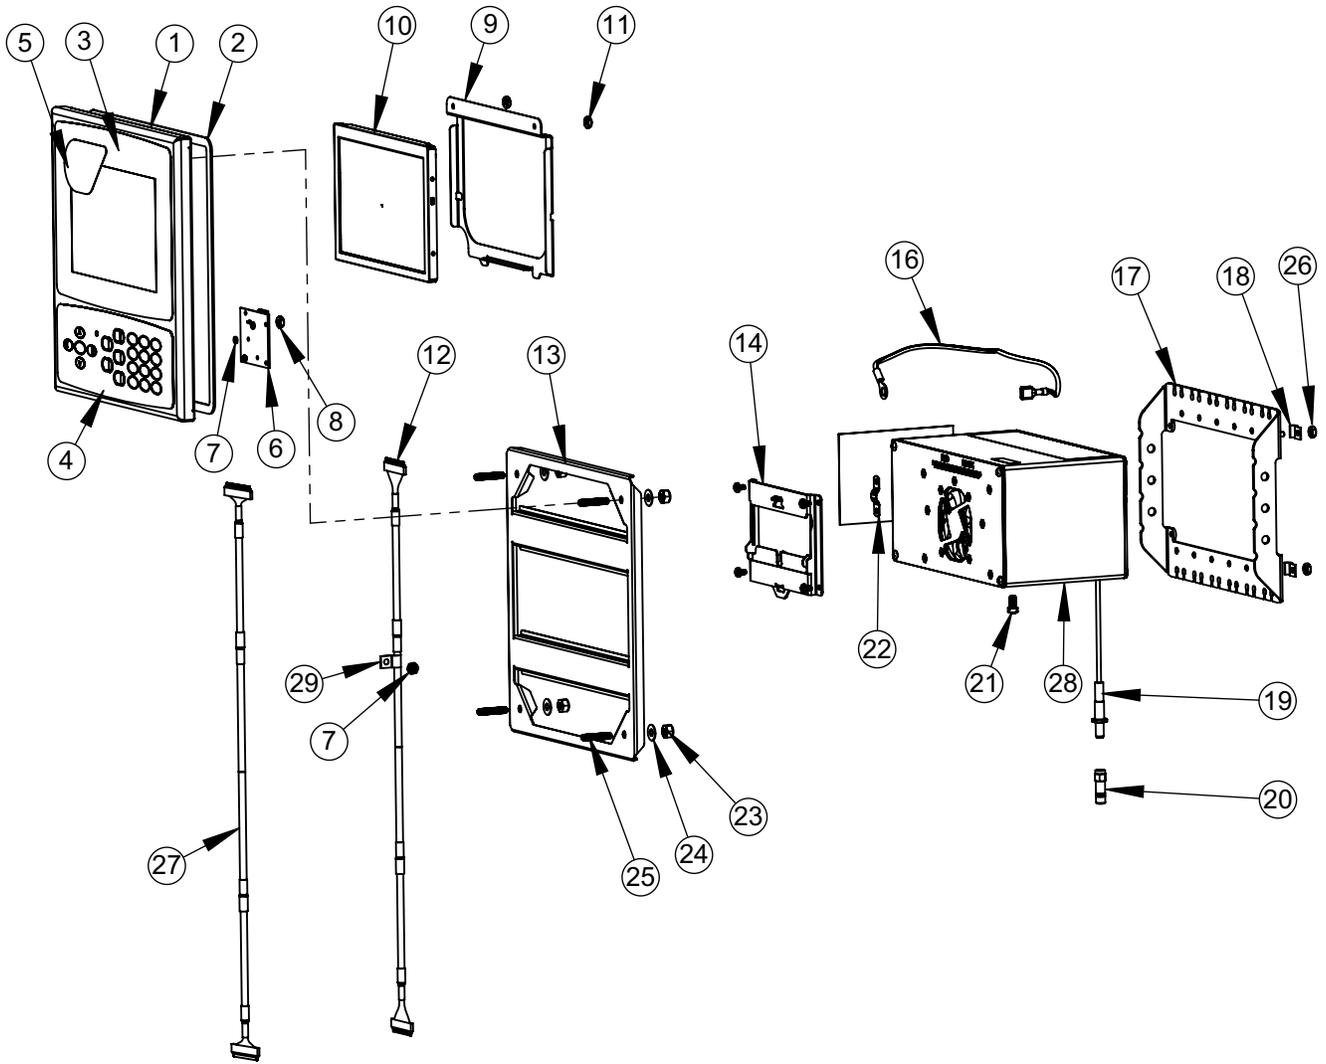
Replacement Parts Drawing - Panel Enclosure
